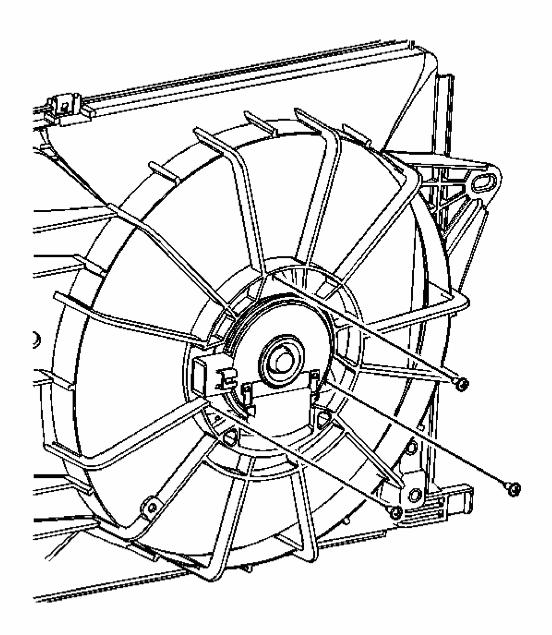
Identifying Cooling Fan Motor Retaining Bolts Courtesy of GENERAL MOTORS CORP.
